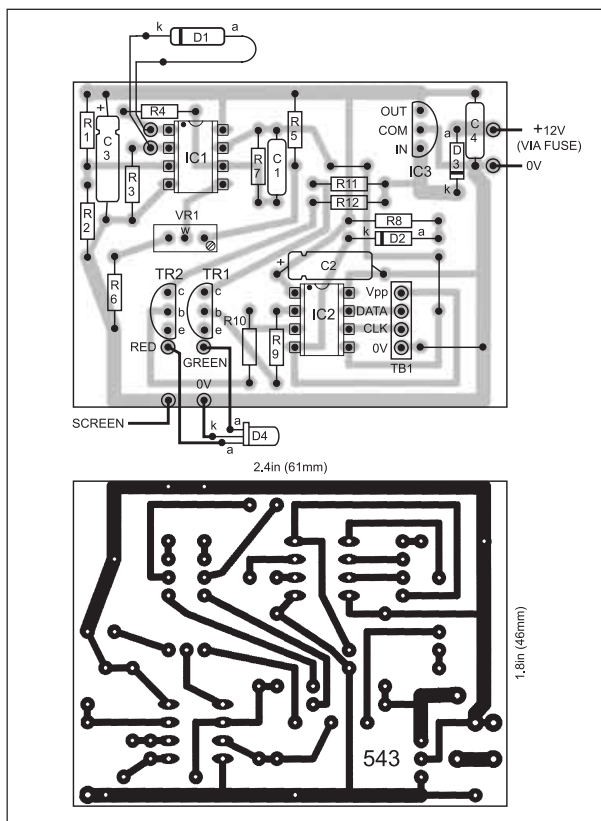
Frost Box Mk2 printed circuit board component layout, wiring and full-size copperfoil master pattern
